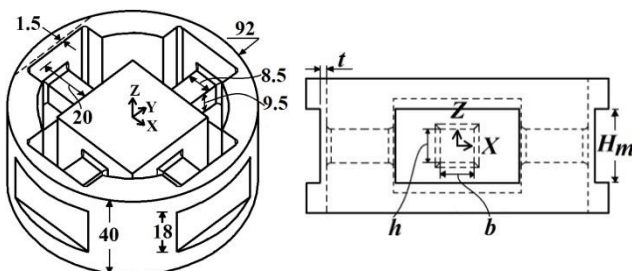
Initial dimensions & design variables of the sensor in millimeters
